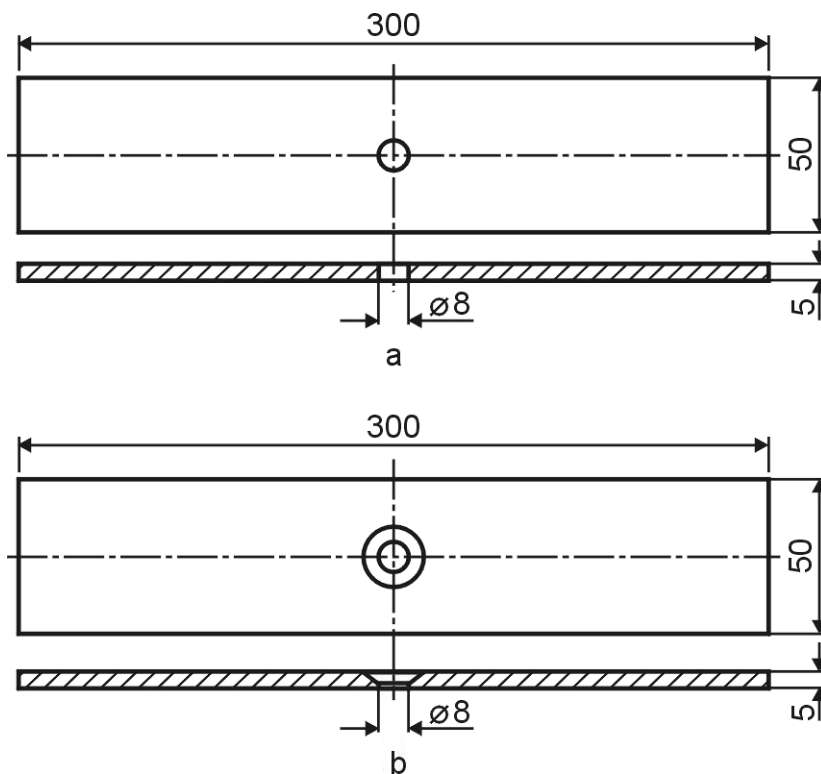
Manufacturing version of plate test pieces with hole: a – plate with cylindrical hole; b – plate with countersunk hole
